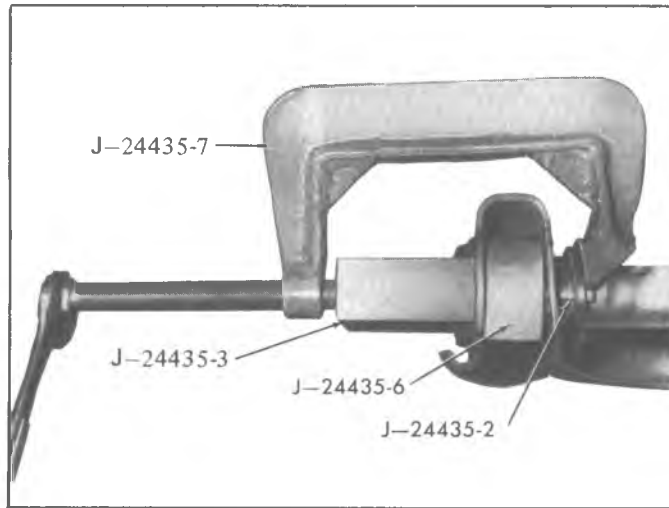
B—Lower Control Arm Rubber Bushing Removal
